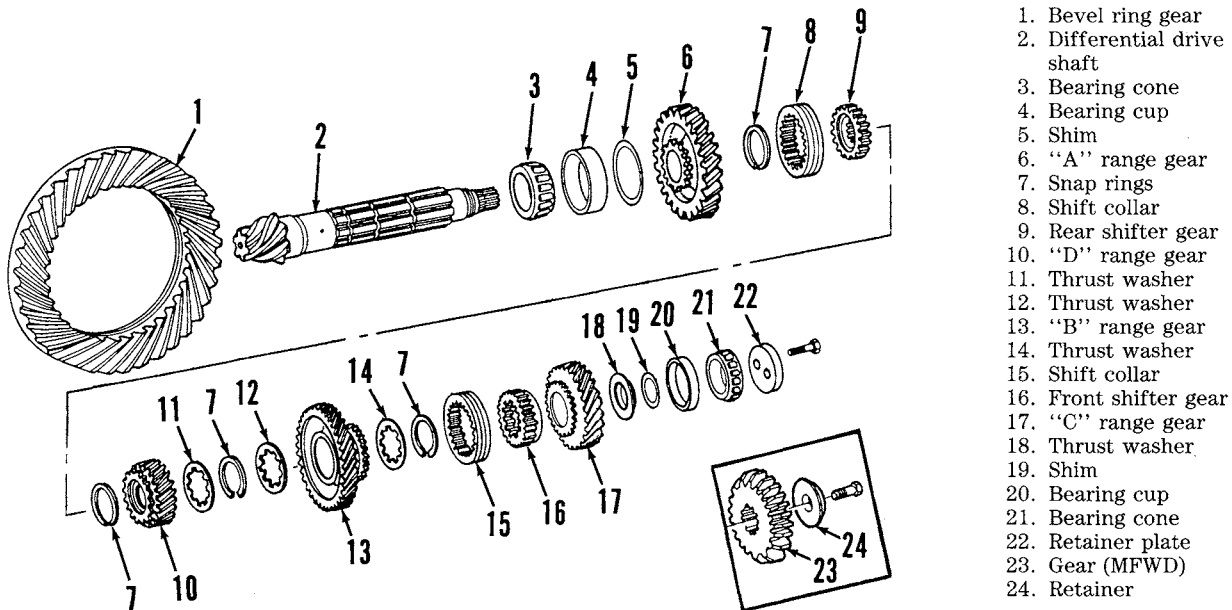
Exploded view of differential drive shaft and associated parts. Gear (23) is used on models equipped with mechanical front-wheel drive. On Model 4650, thrust washer (12) must be installed with stepped side toward snap ring (7).
